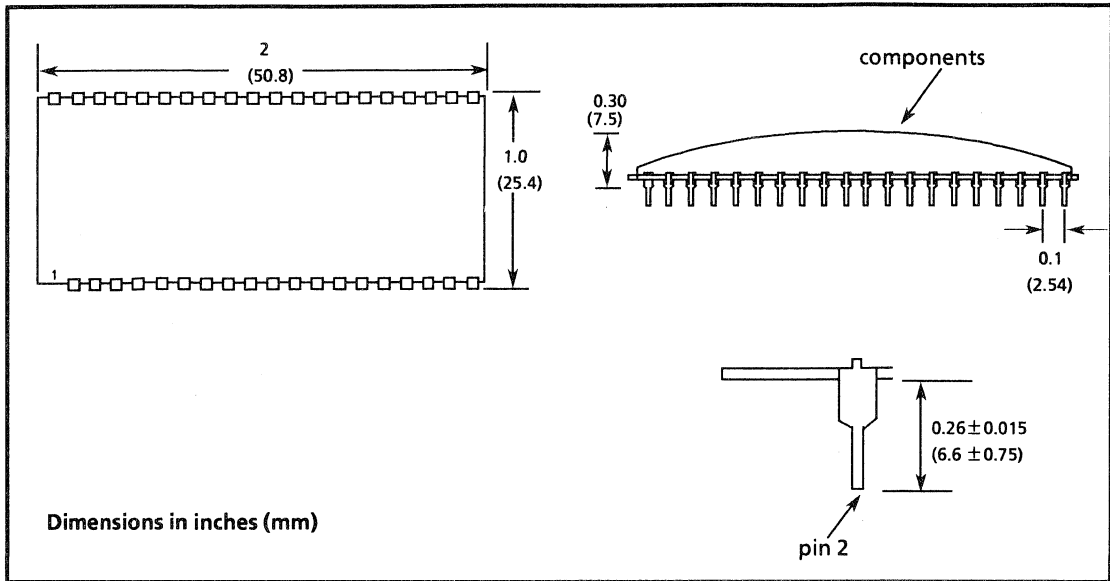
Physical Dimensions of 40 Pin Dual In Line Hybrid Package
